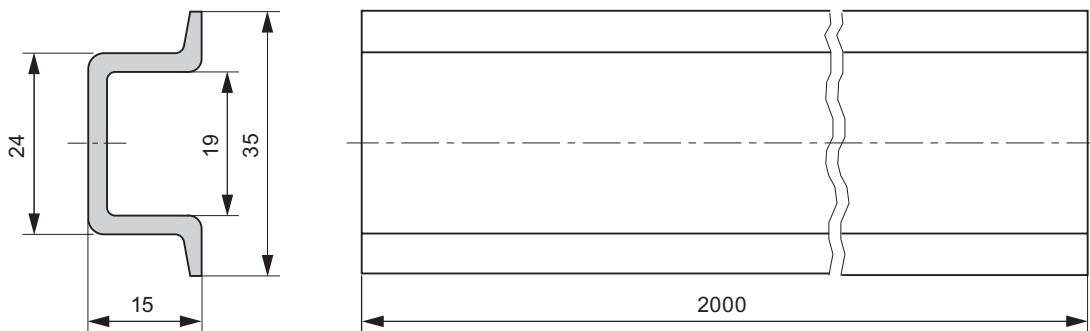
Dimensional drawing of the 2000 mm standard rail
